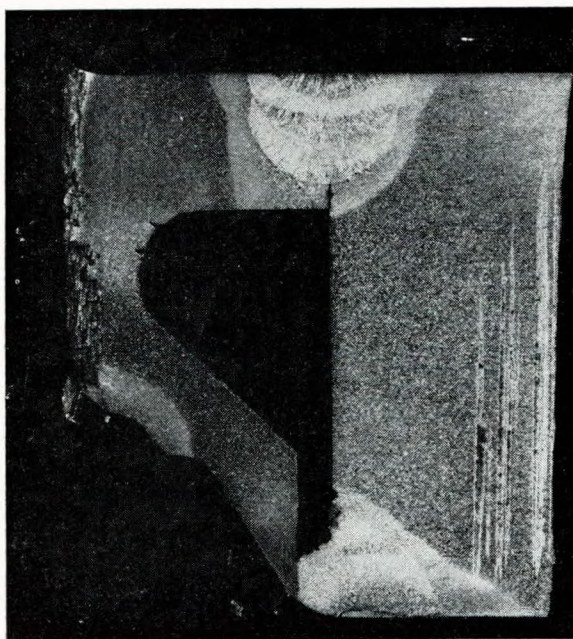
Macrosection showing two types of weld securing flame plate to exhaust valve seat
